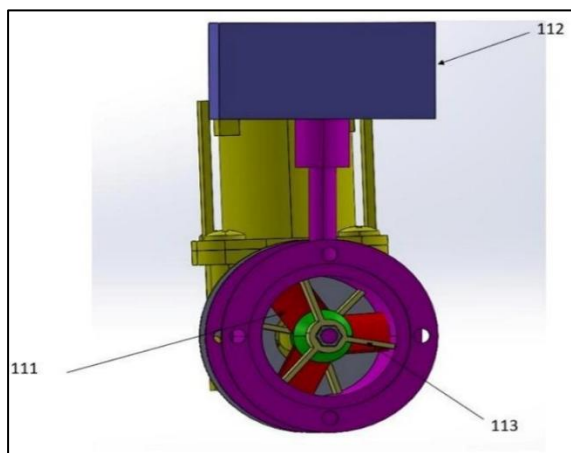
Detailed CAD view of the turbine flow measurement assembly.
